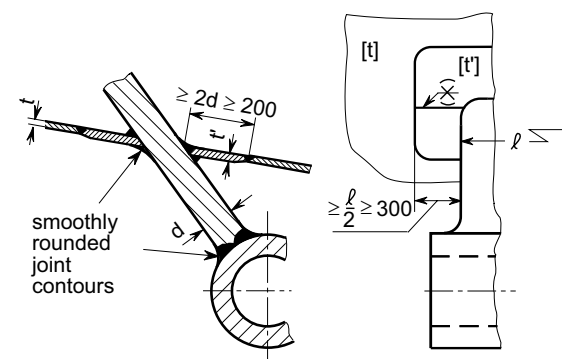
Shaft bracket with integrally cast welding flanges
